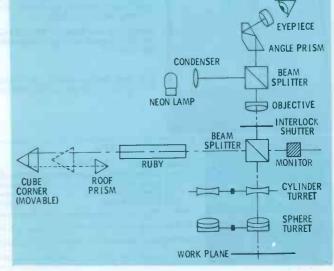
Diagram of a welding system that uses a laser.
